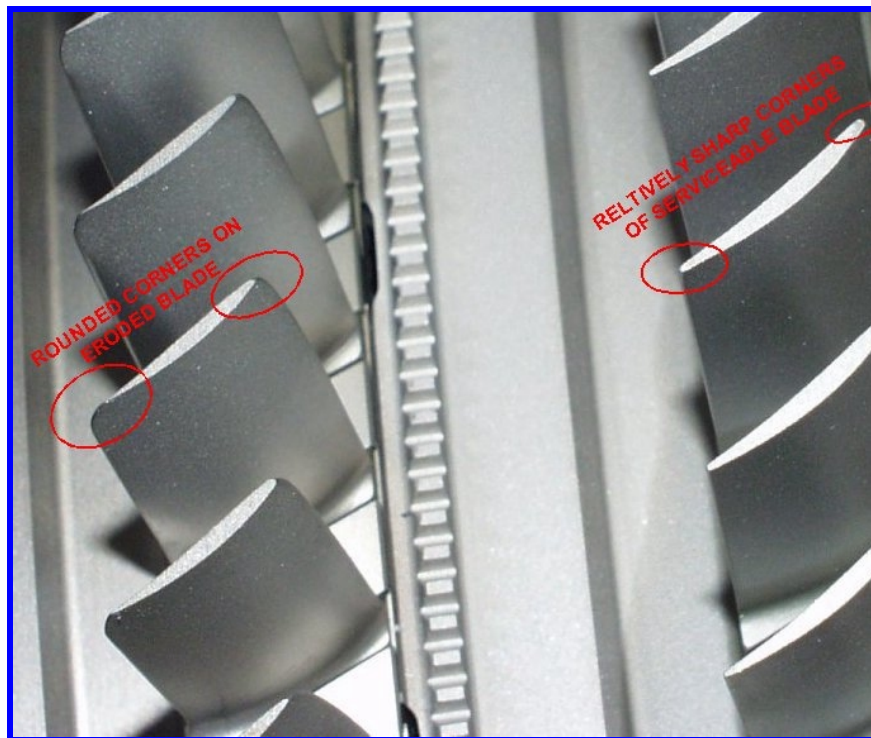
Trailing edge and blade-tip corners on left compressor blades eroded from exposure to fine dust during operation.
